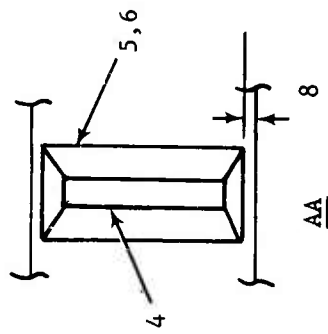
SHILLELAGH AFT SECTION - REAR VIEW
